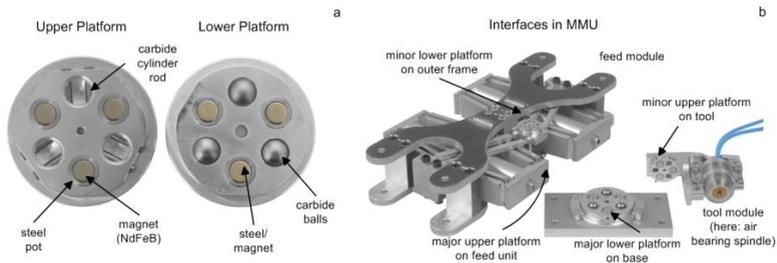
Design of the mechanical interface (a), uncoupled MMU assembly [3] with air bearing spindle [5] (b)
